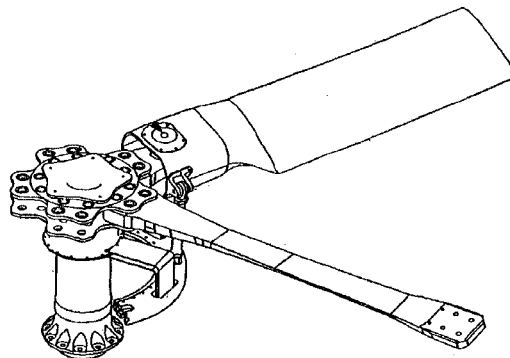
Soft Inplane Bearingless Rotor Hub; Boeing-Sikorsky RAH-66²⁴
